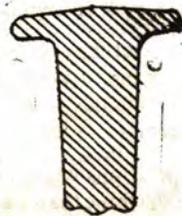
BEND TEST - FIG-11 FLATTENING TEST
